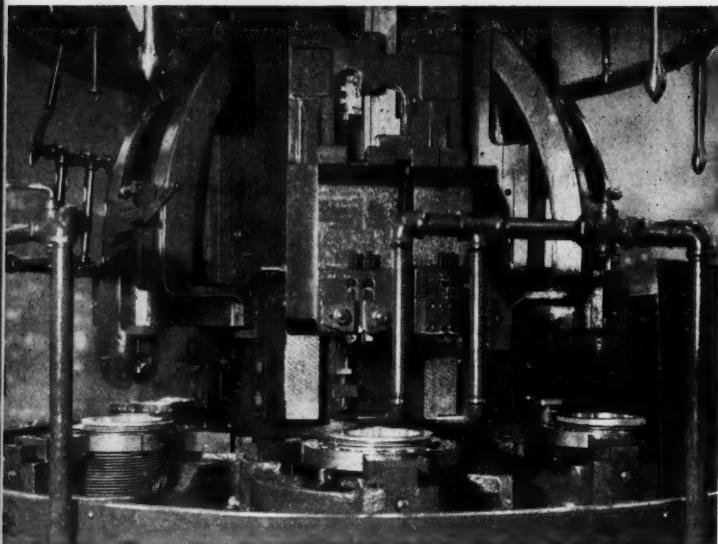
Cylinder Heads are Machined in this Six-Station Mult-Au-Matic
